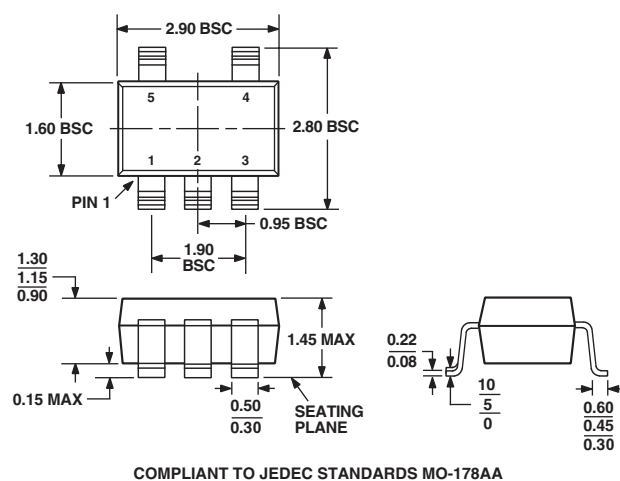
5-Lead Small Outline Transistor Package [SOT-23]
